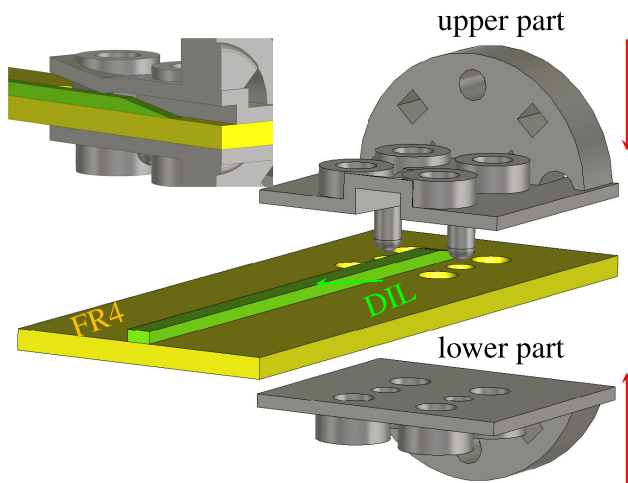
Exploded-view drawing and cross section of the used waveguide to DIL transition.
